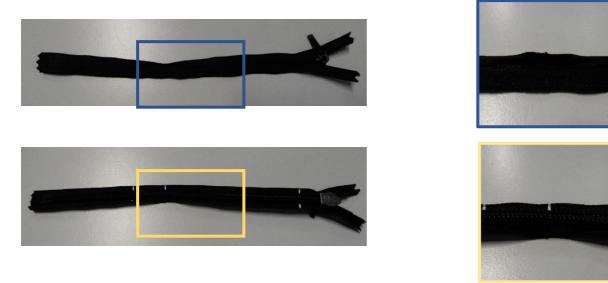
Folded/ wrinkled zipper with top view (top) and bottom view (bottom)
